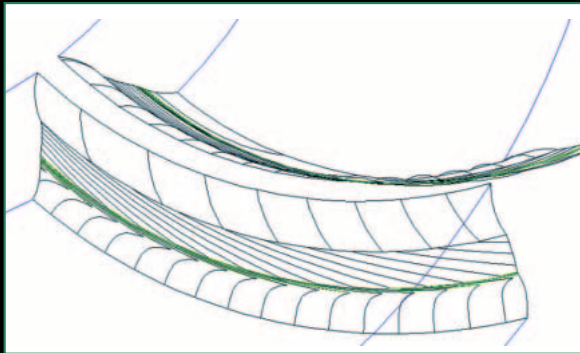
DDS model of cutting marks generated by the cutter from fig. 2 on a hypoid gear tooth.
